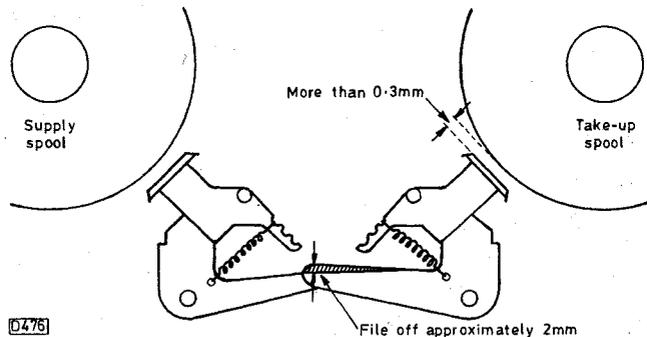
Mechanical modification to cure tape damage due to looping when the machine stops after rewind.
